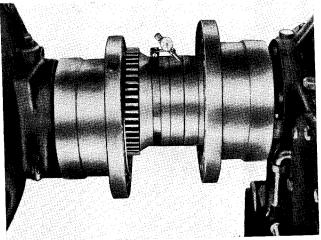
Checking Angular Alignment with Dial Indicator on Face of Hub
